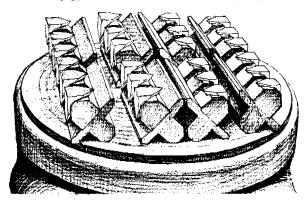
Triple-V jigs on chuck of grinder ready to cut end faces.
